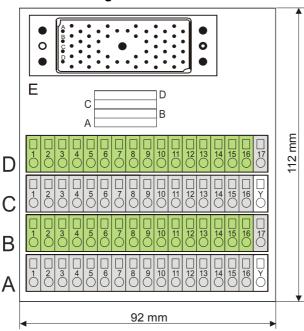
Mechanical design and dimensions of Terminal Module H 7018
